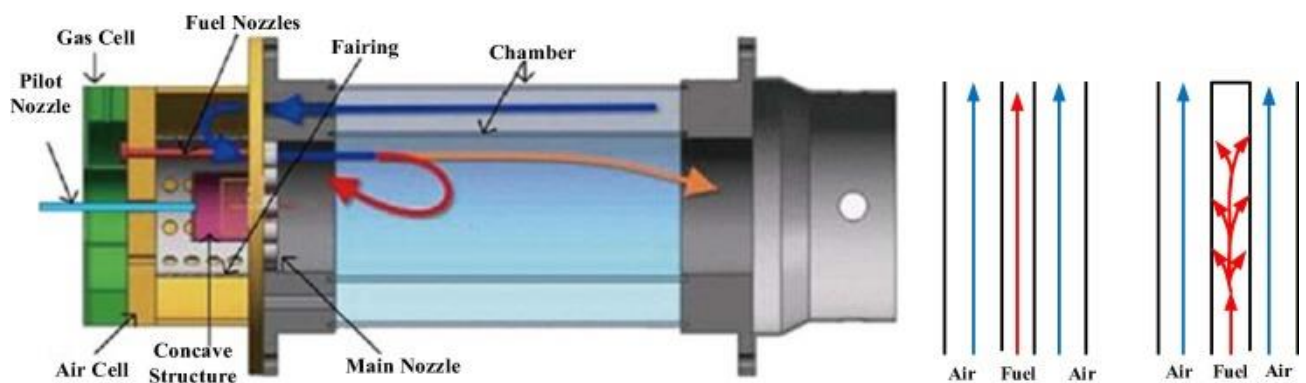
Cross-section view of the combustion model combustor and fuel nozzle [18].
